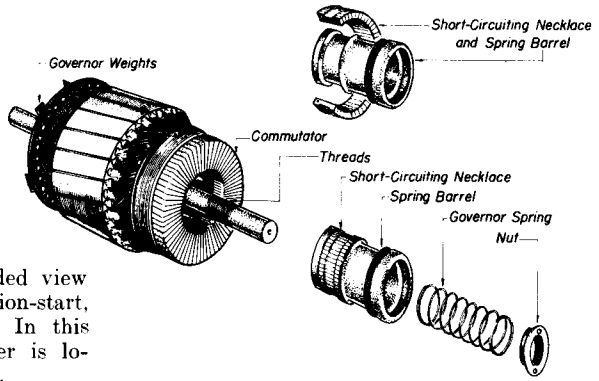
An exploded view of the rotor of a repulsion-start, induction-run motor. In this type, the brush holder is located in the end plate.
